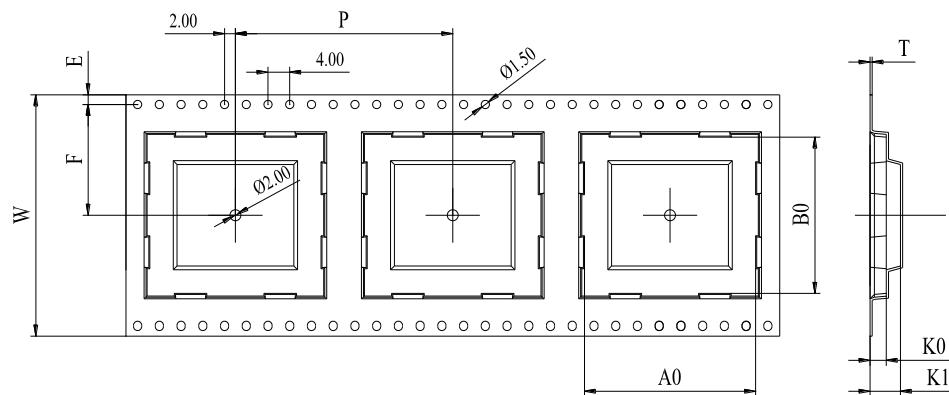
Carrier Tape Dimension Drawing (Unit: mm)
